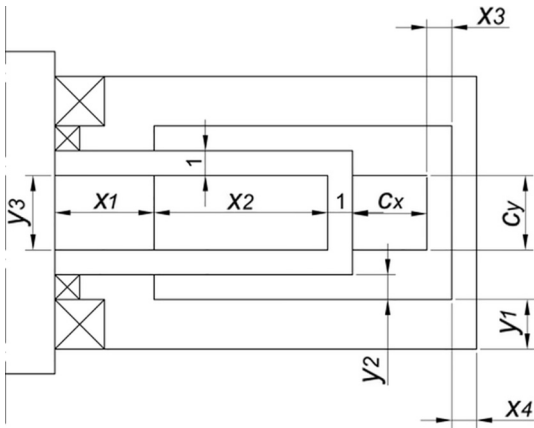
Disc type (device 1) MRF brake's dimensional parameters.
